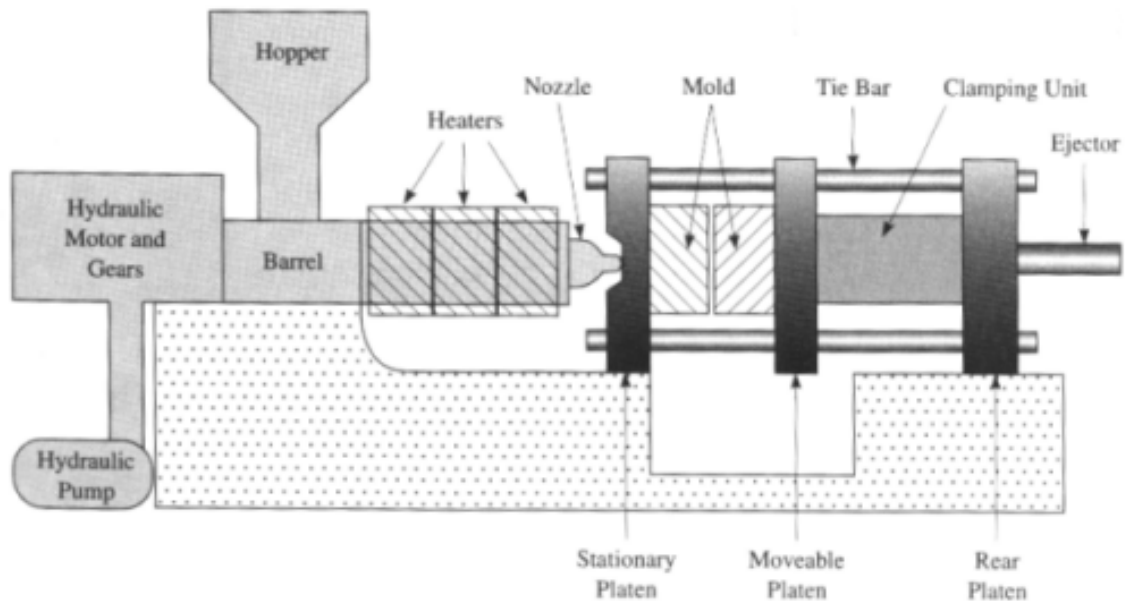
Scheme of an injection molding machine; the three principal parts can be noticed: the injection group on the left, the mold in the center and the clamping unit on the right.
